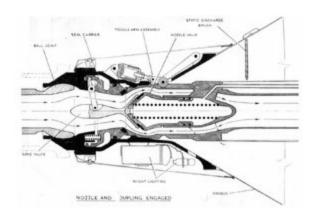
Mk 6 probe nozzle engaged in Mk 6 reception coupling
